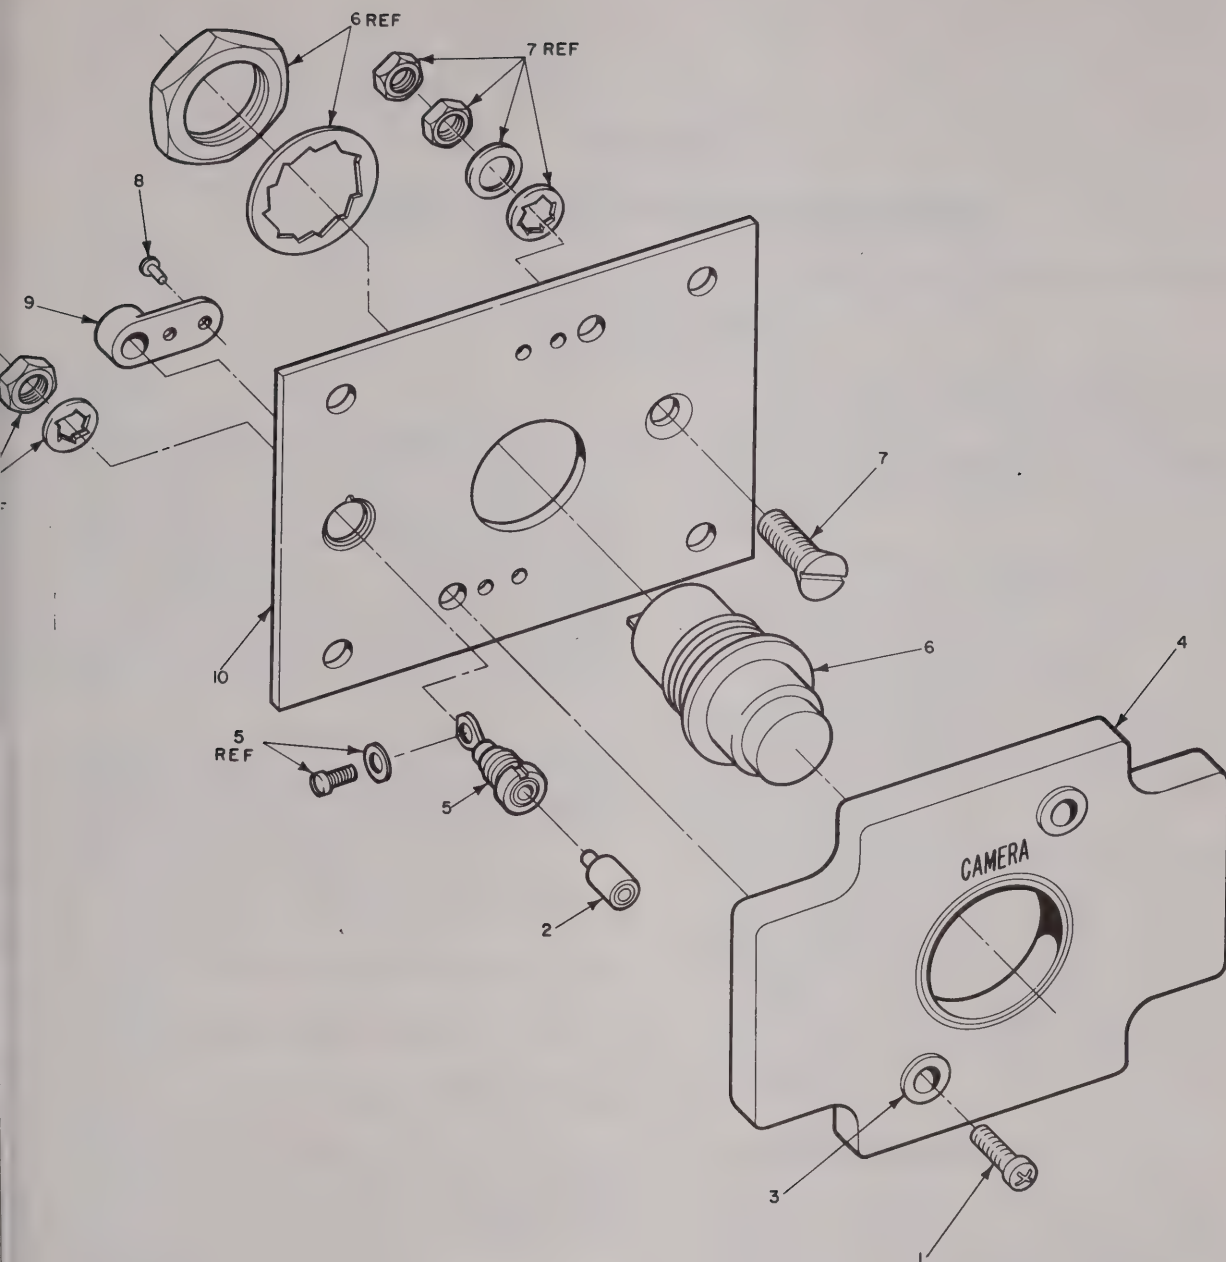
(3). Photo system assembly, exploded view (sheet 3 of 4).
